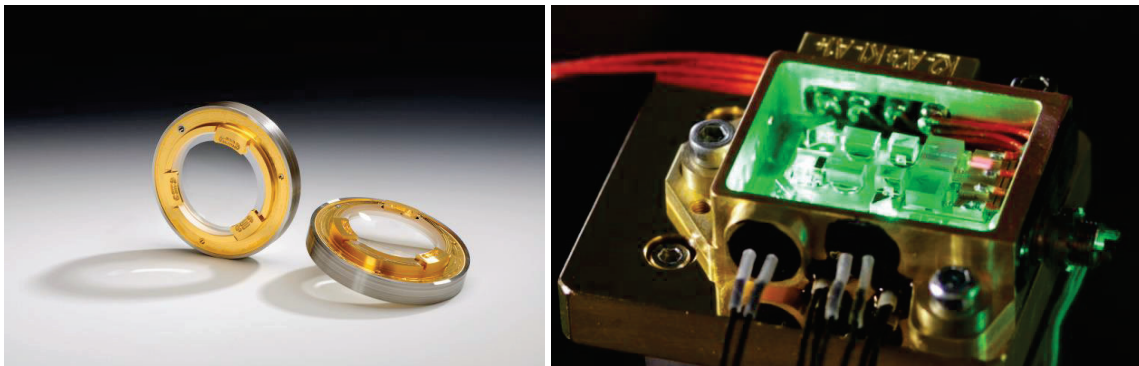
(Left) Large lens mount soldered with SJB and (right) assembled miniaturized green laser device. [6, 8]
